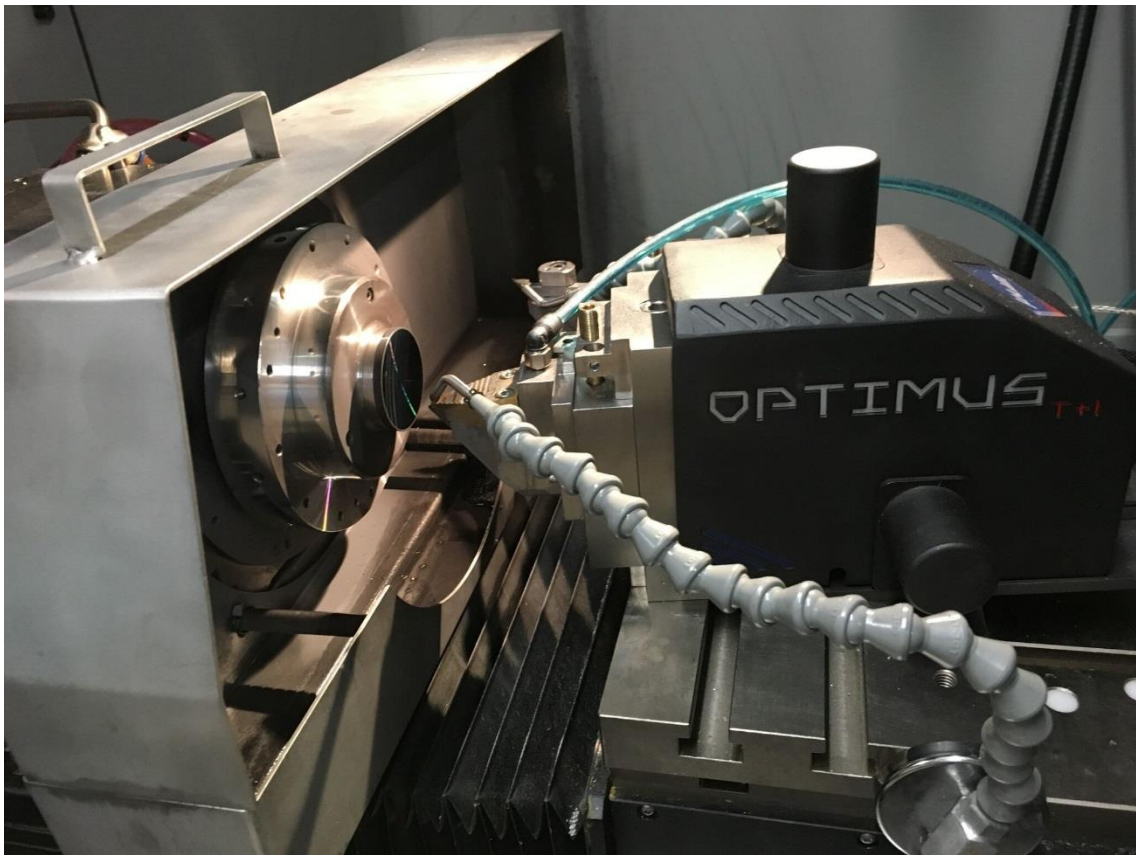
Ultraprecision CNC lathe for depth controlled machining.
